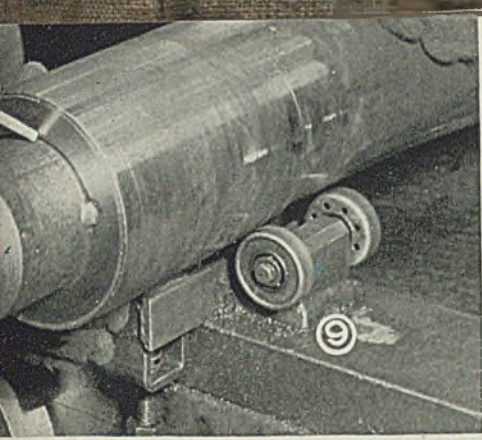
Arc welding threaded pipe connection in hub end to permit introduction of fluid which is held under pressure during forming operations, acting as a flexible "mandrel"
